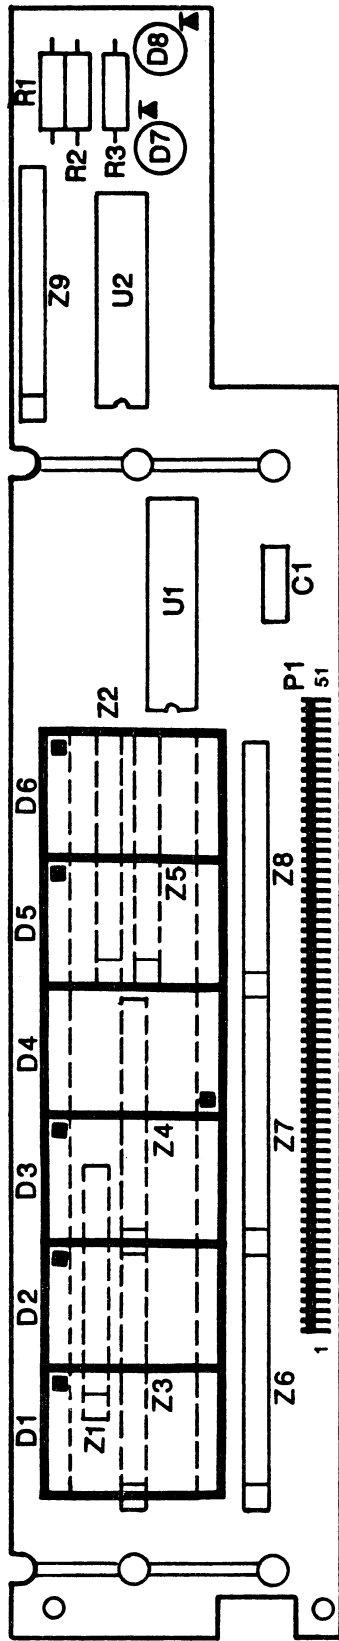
Display Circuit Card Assembly A1A2, Parts Location Diagram
